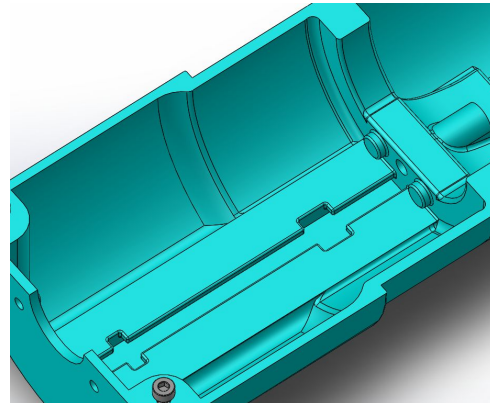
Close up of the inner surface of the lower inner mechanisms sleeve showcasing the linear motor mount track and spring alignment pegs.
